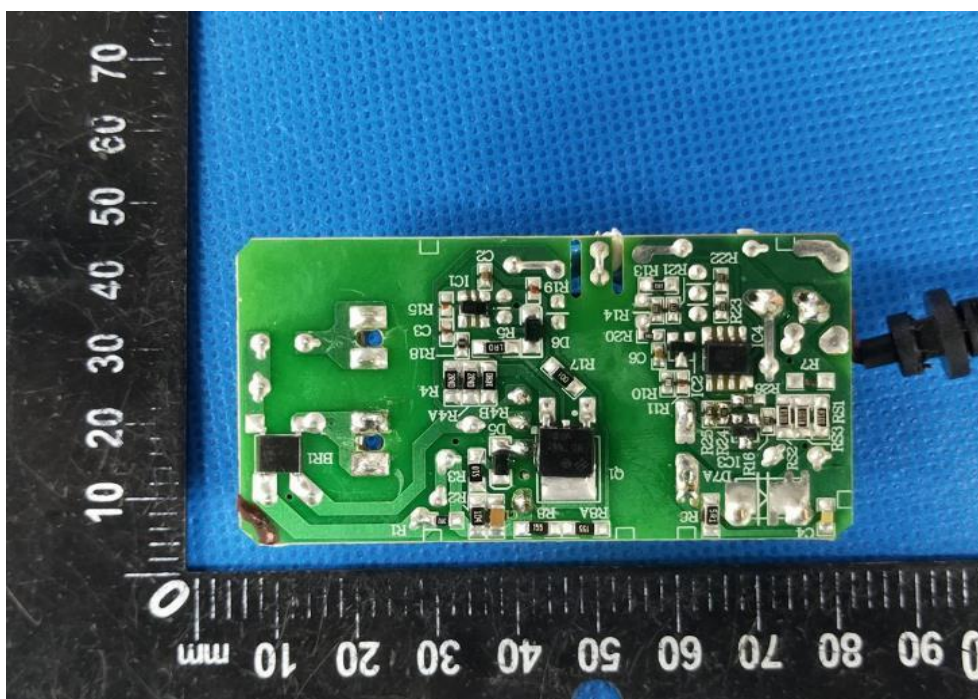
PCB top side view for model IVPxxxx-yyyyD (without D7A)
